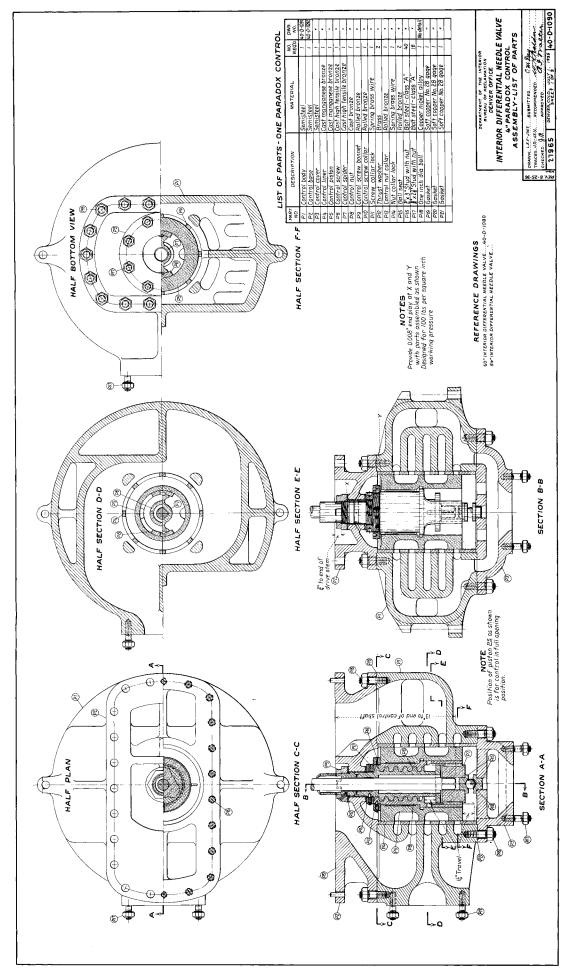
Drawing 40-D-1090, assembly of 4-inch paradox control.
